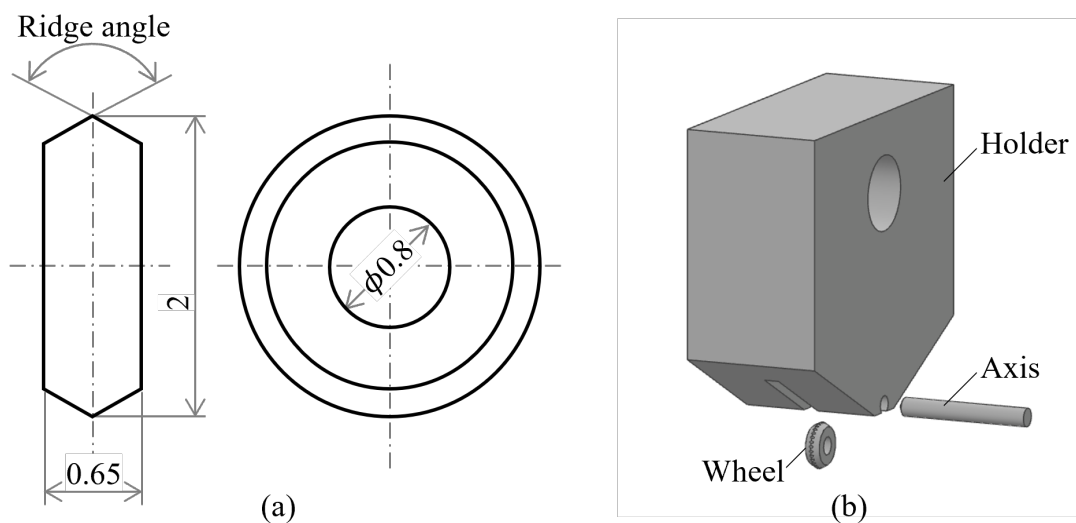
(a) Dimension of scribing wheel and (b) schematic illustration of wheel holder. Scribing wheel has a hole and set in the slit of holder by axis.
